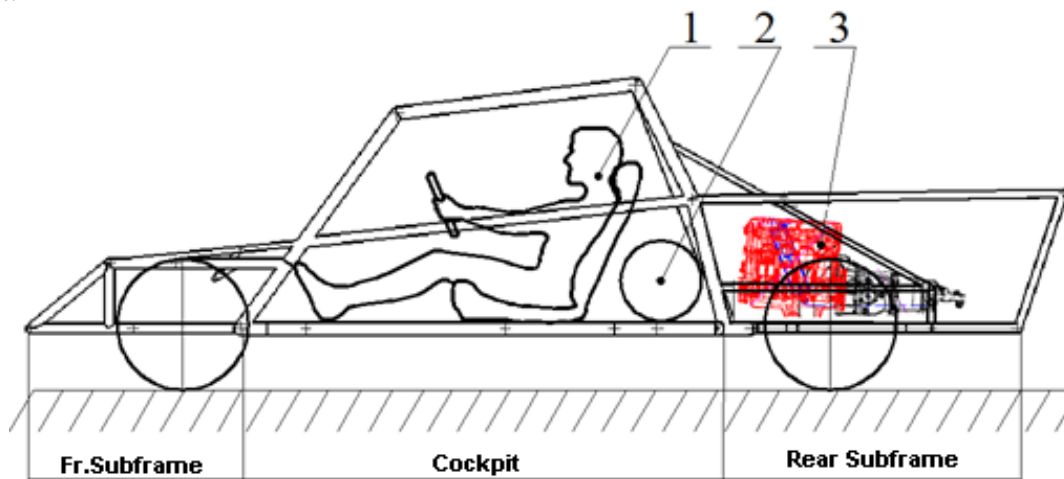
D2 Buggy layout and division into three substructures: 1 – driver; 2 – fuel tank; 3 – engine
